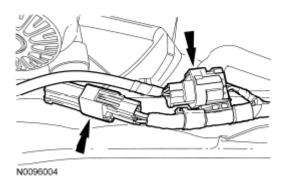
Locating EPAS System Electrical Connectors Courtesy of FORD MOTOR CO.
